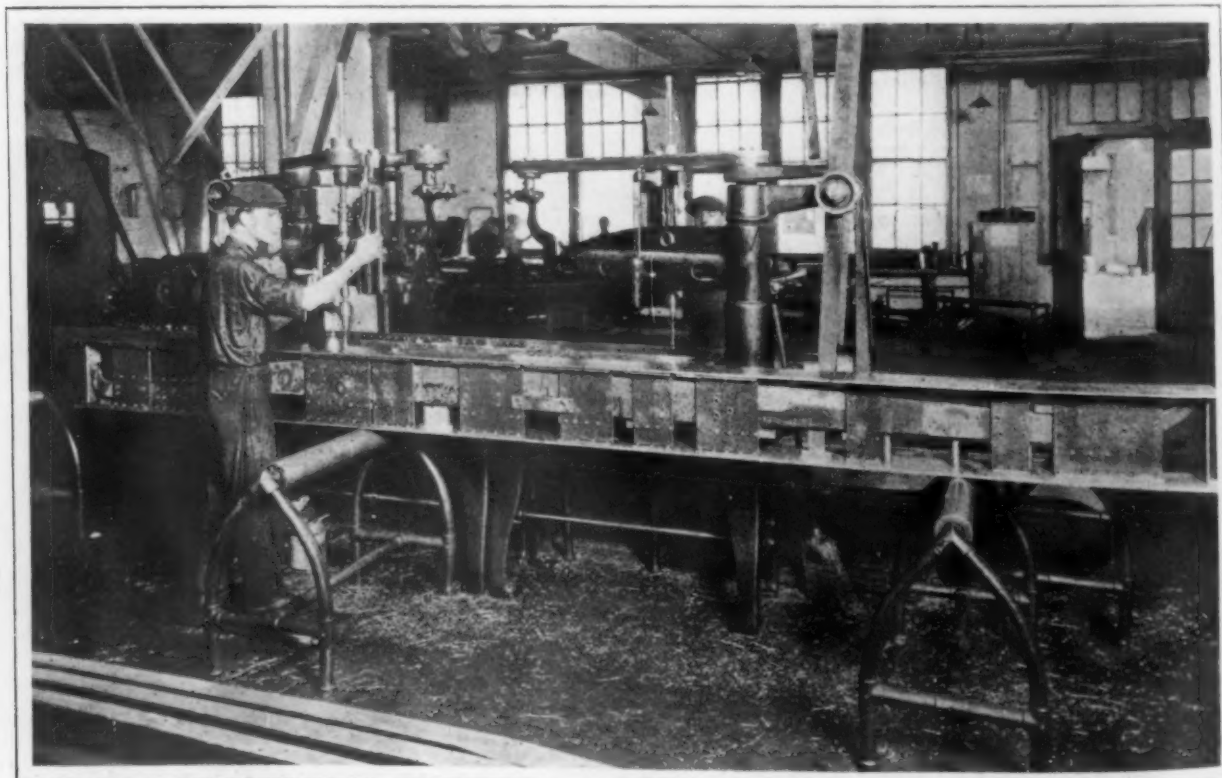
View of a Planer Type Ingersoll Milling Machine Equipped with a 25-In. Cutter on the Vertical Spindle Sweeping the Bottom of Steel Horse Constructed of Pipe and Fittings Is Shown
